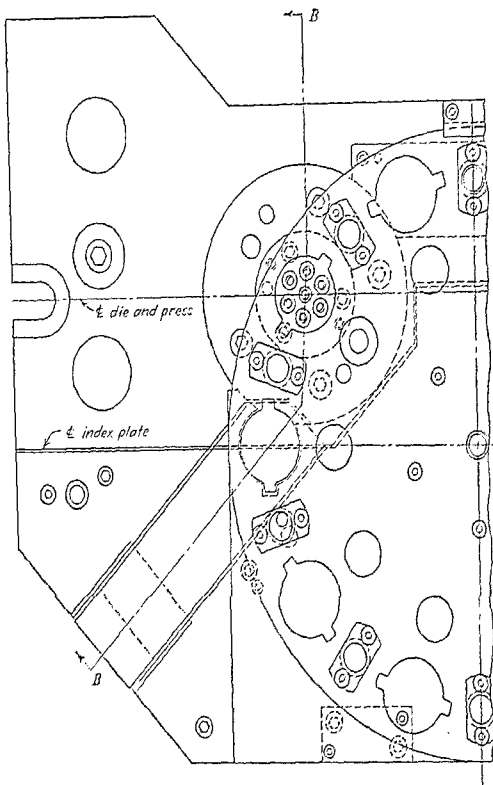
Plan view of die for shaving multiple holes at an angle. (Oldsmobile Division, General Motors Corp.)
